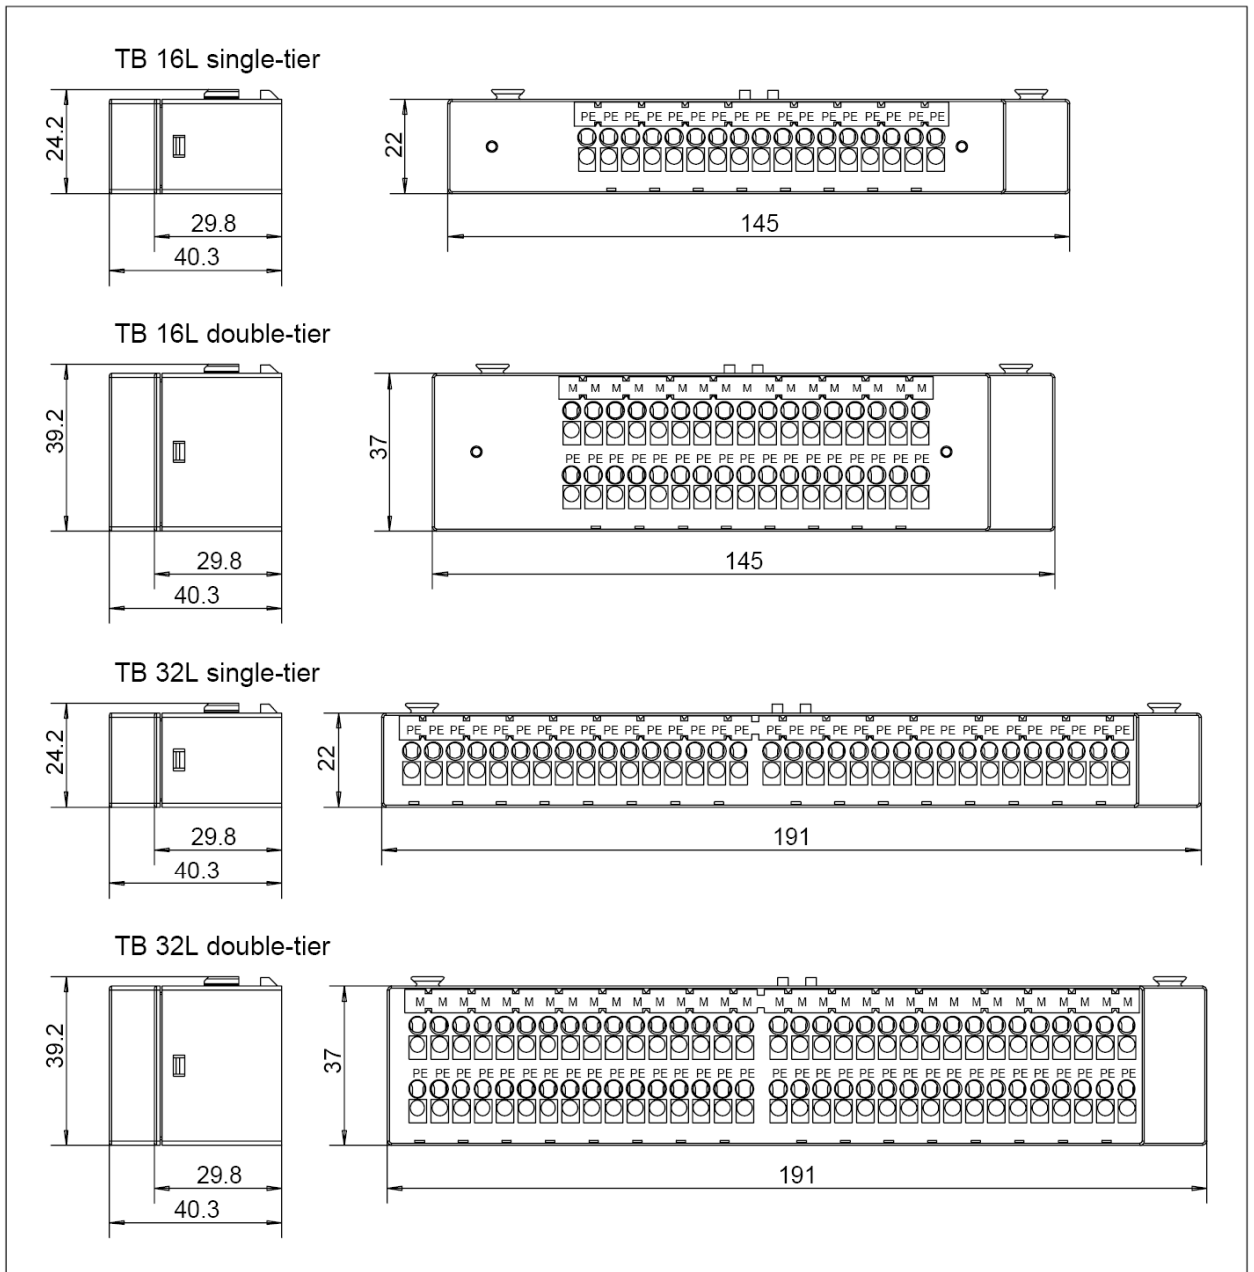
TB 16L/TB 32L Supplementary Terminals, Dimension Drawing
